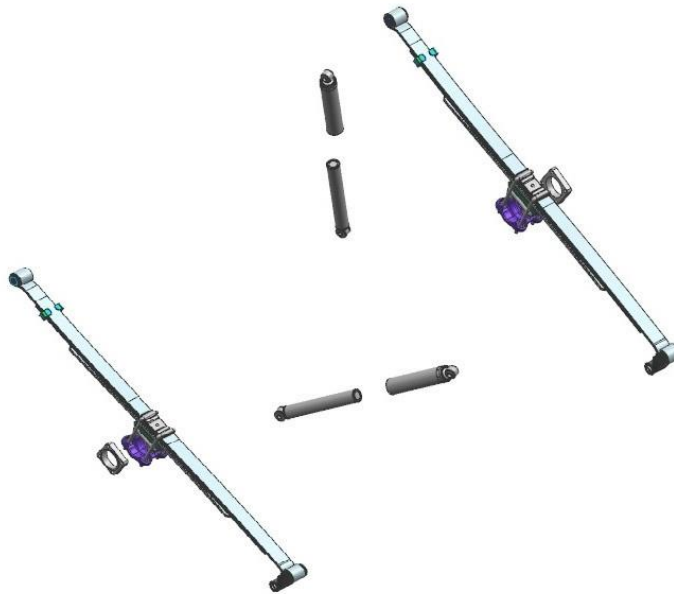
Baseline Leaf Spring Rear Suspension Exploded View
